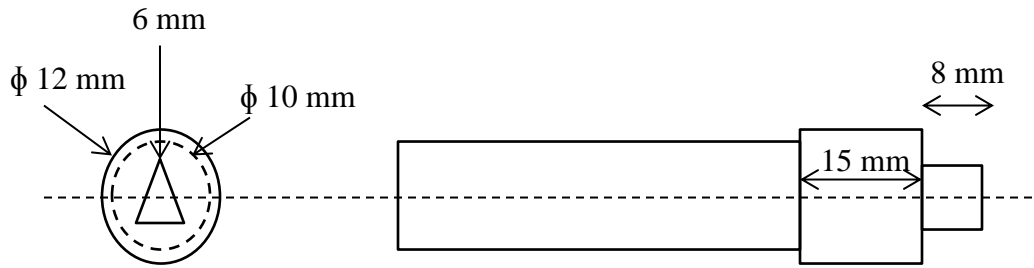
Schematic diagram of tool with triangular pin of 8 mm diameter and a shoulder diameter of 12 mm
